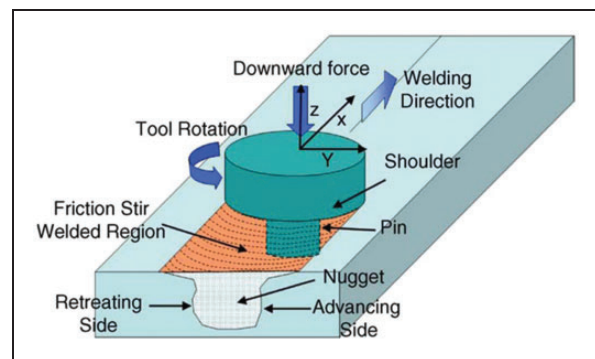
A schematic diagram of the friction stir welding process.<sup>59</sup>
